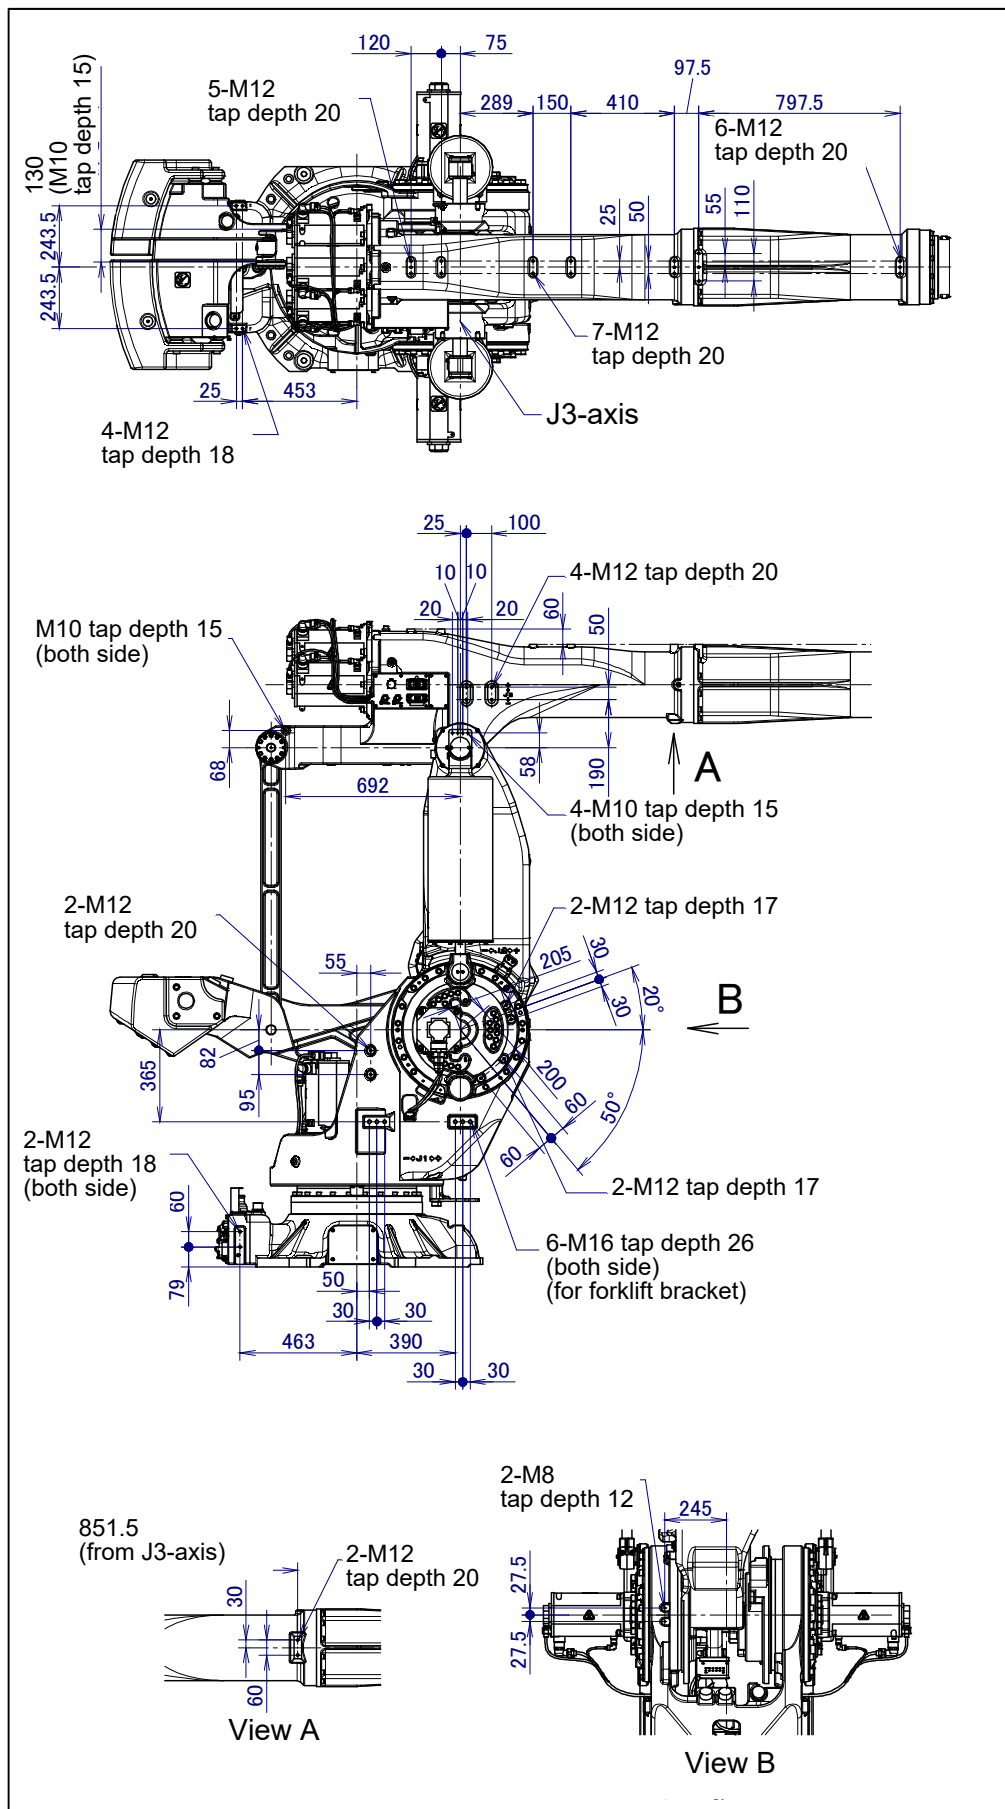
(c) Equipment mounting faces (M-900/B/400L) (1/2)
